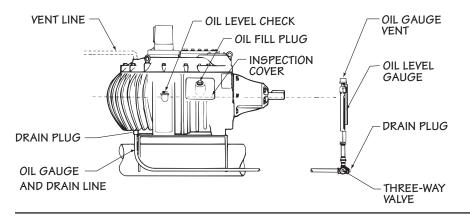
Oil Gauge and Drain Line (a Series 36 Geareducer is illustrated)
